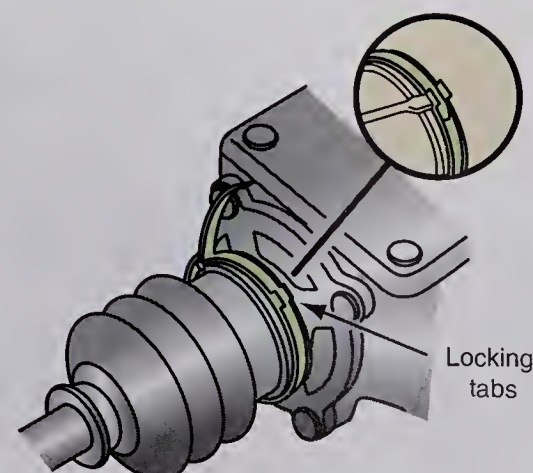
Tightening and staking the inner tie-rod boot clamps.
